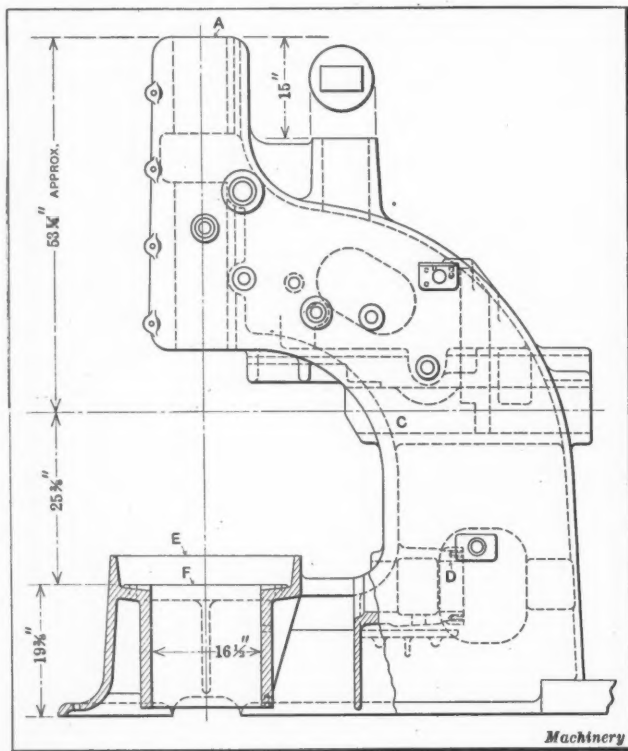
Car-wheel Borer Frame machined on Floor Platen with Portable Motor-driven Tools
